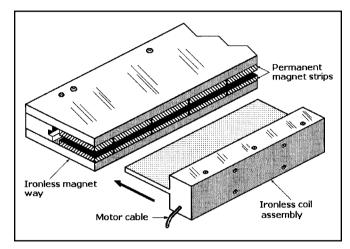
A linear ironless servomotor consists of an ironless magnetic way and an ironless coil assembly.
